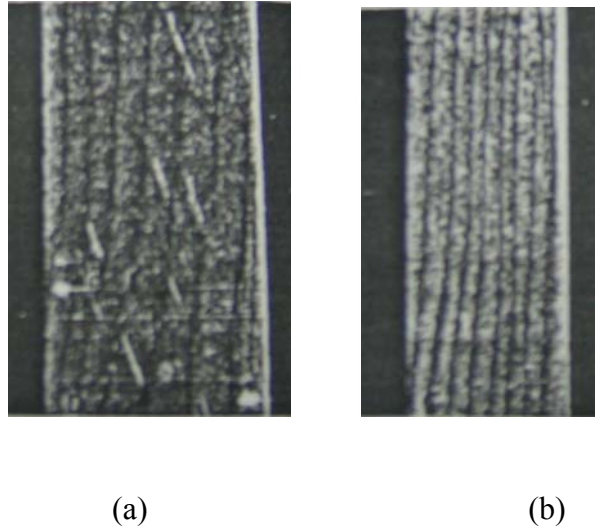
Typical machining defect on Douglas-fir. a) chip mark and b) Raised grain.
